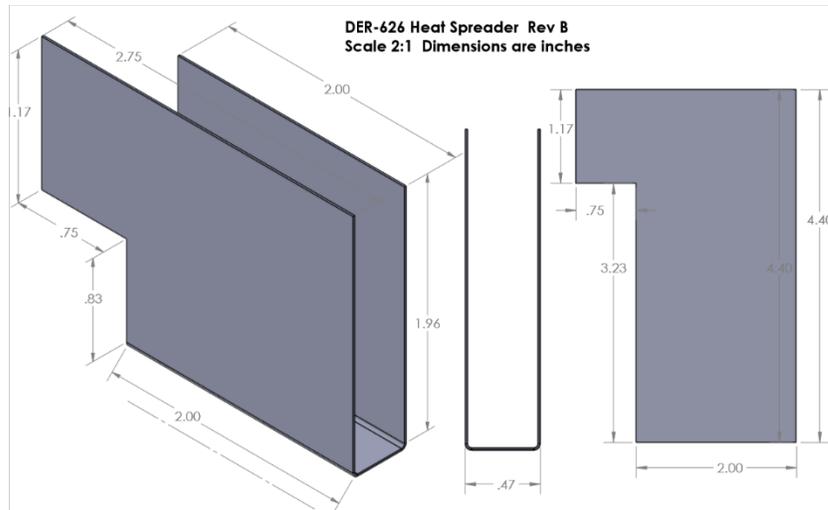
Aluminum Sheet (25 mils thick) Dimensions.
